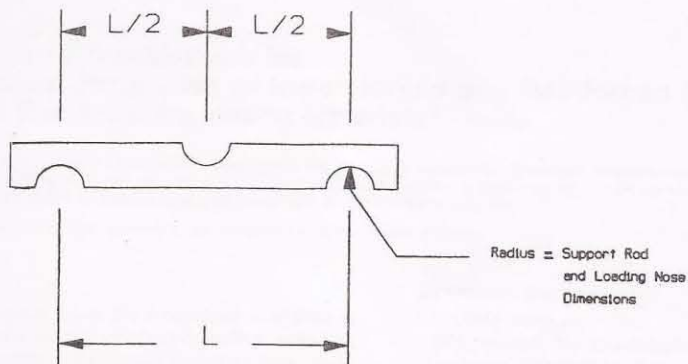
Fixture Used to Set Loading Nose and Support Spacing and Alignment
